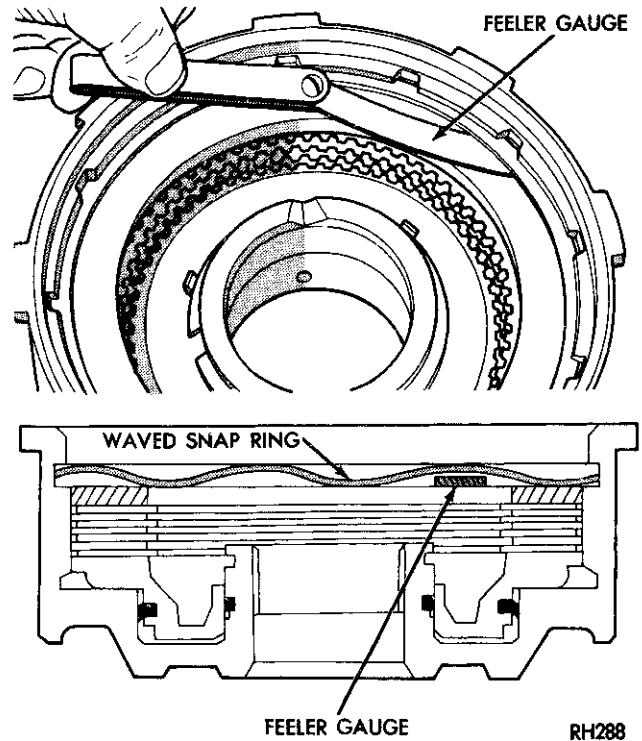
Typical Method Of Measuring Front Clutch Pack Clearance
